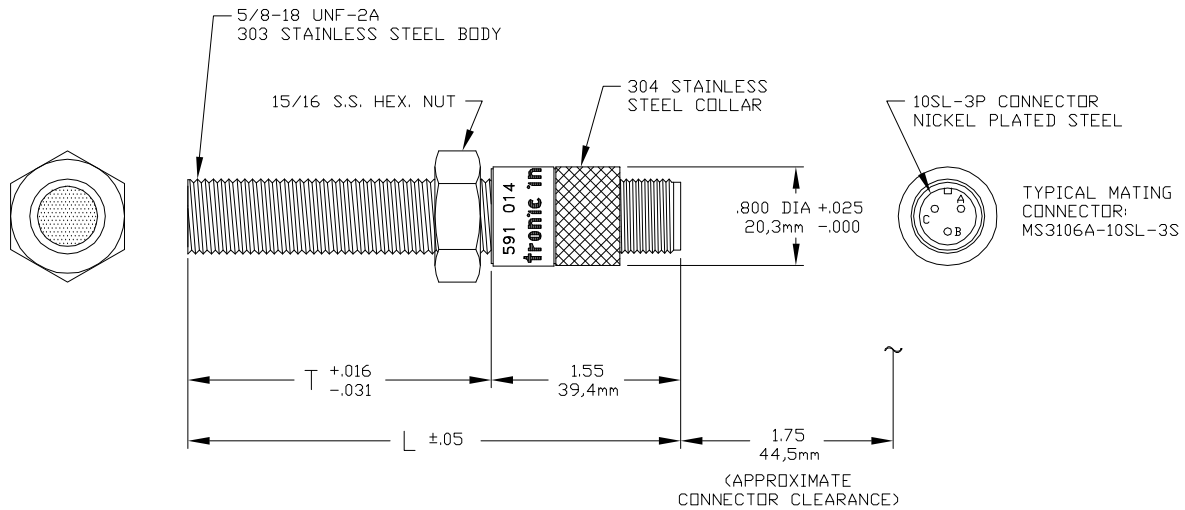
MAGNET ASSEMBLY SALES DRAWING
